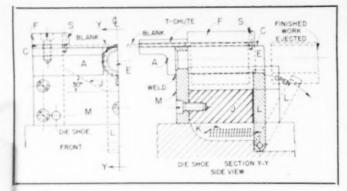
Sketch showing manner in which blank is fed through T-chute into forming dis.
